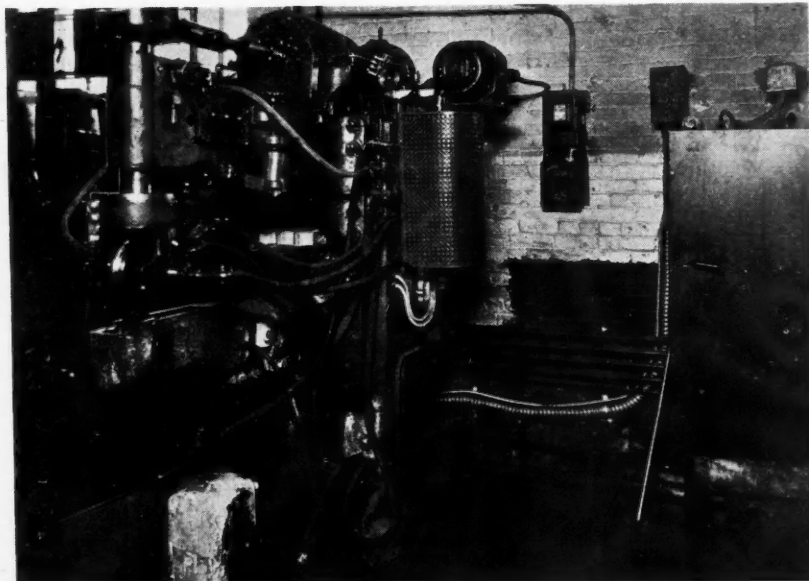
Intermittent and line-welding machine equipped with Thyatron control. The control panel is in cabinet at right
